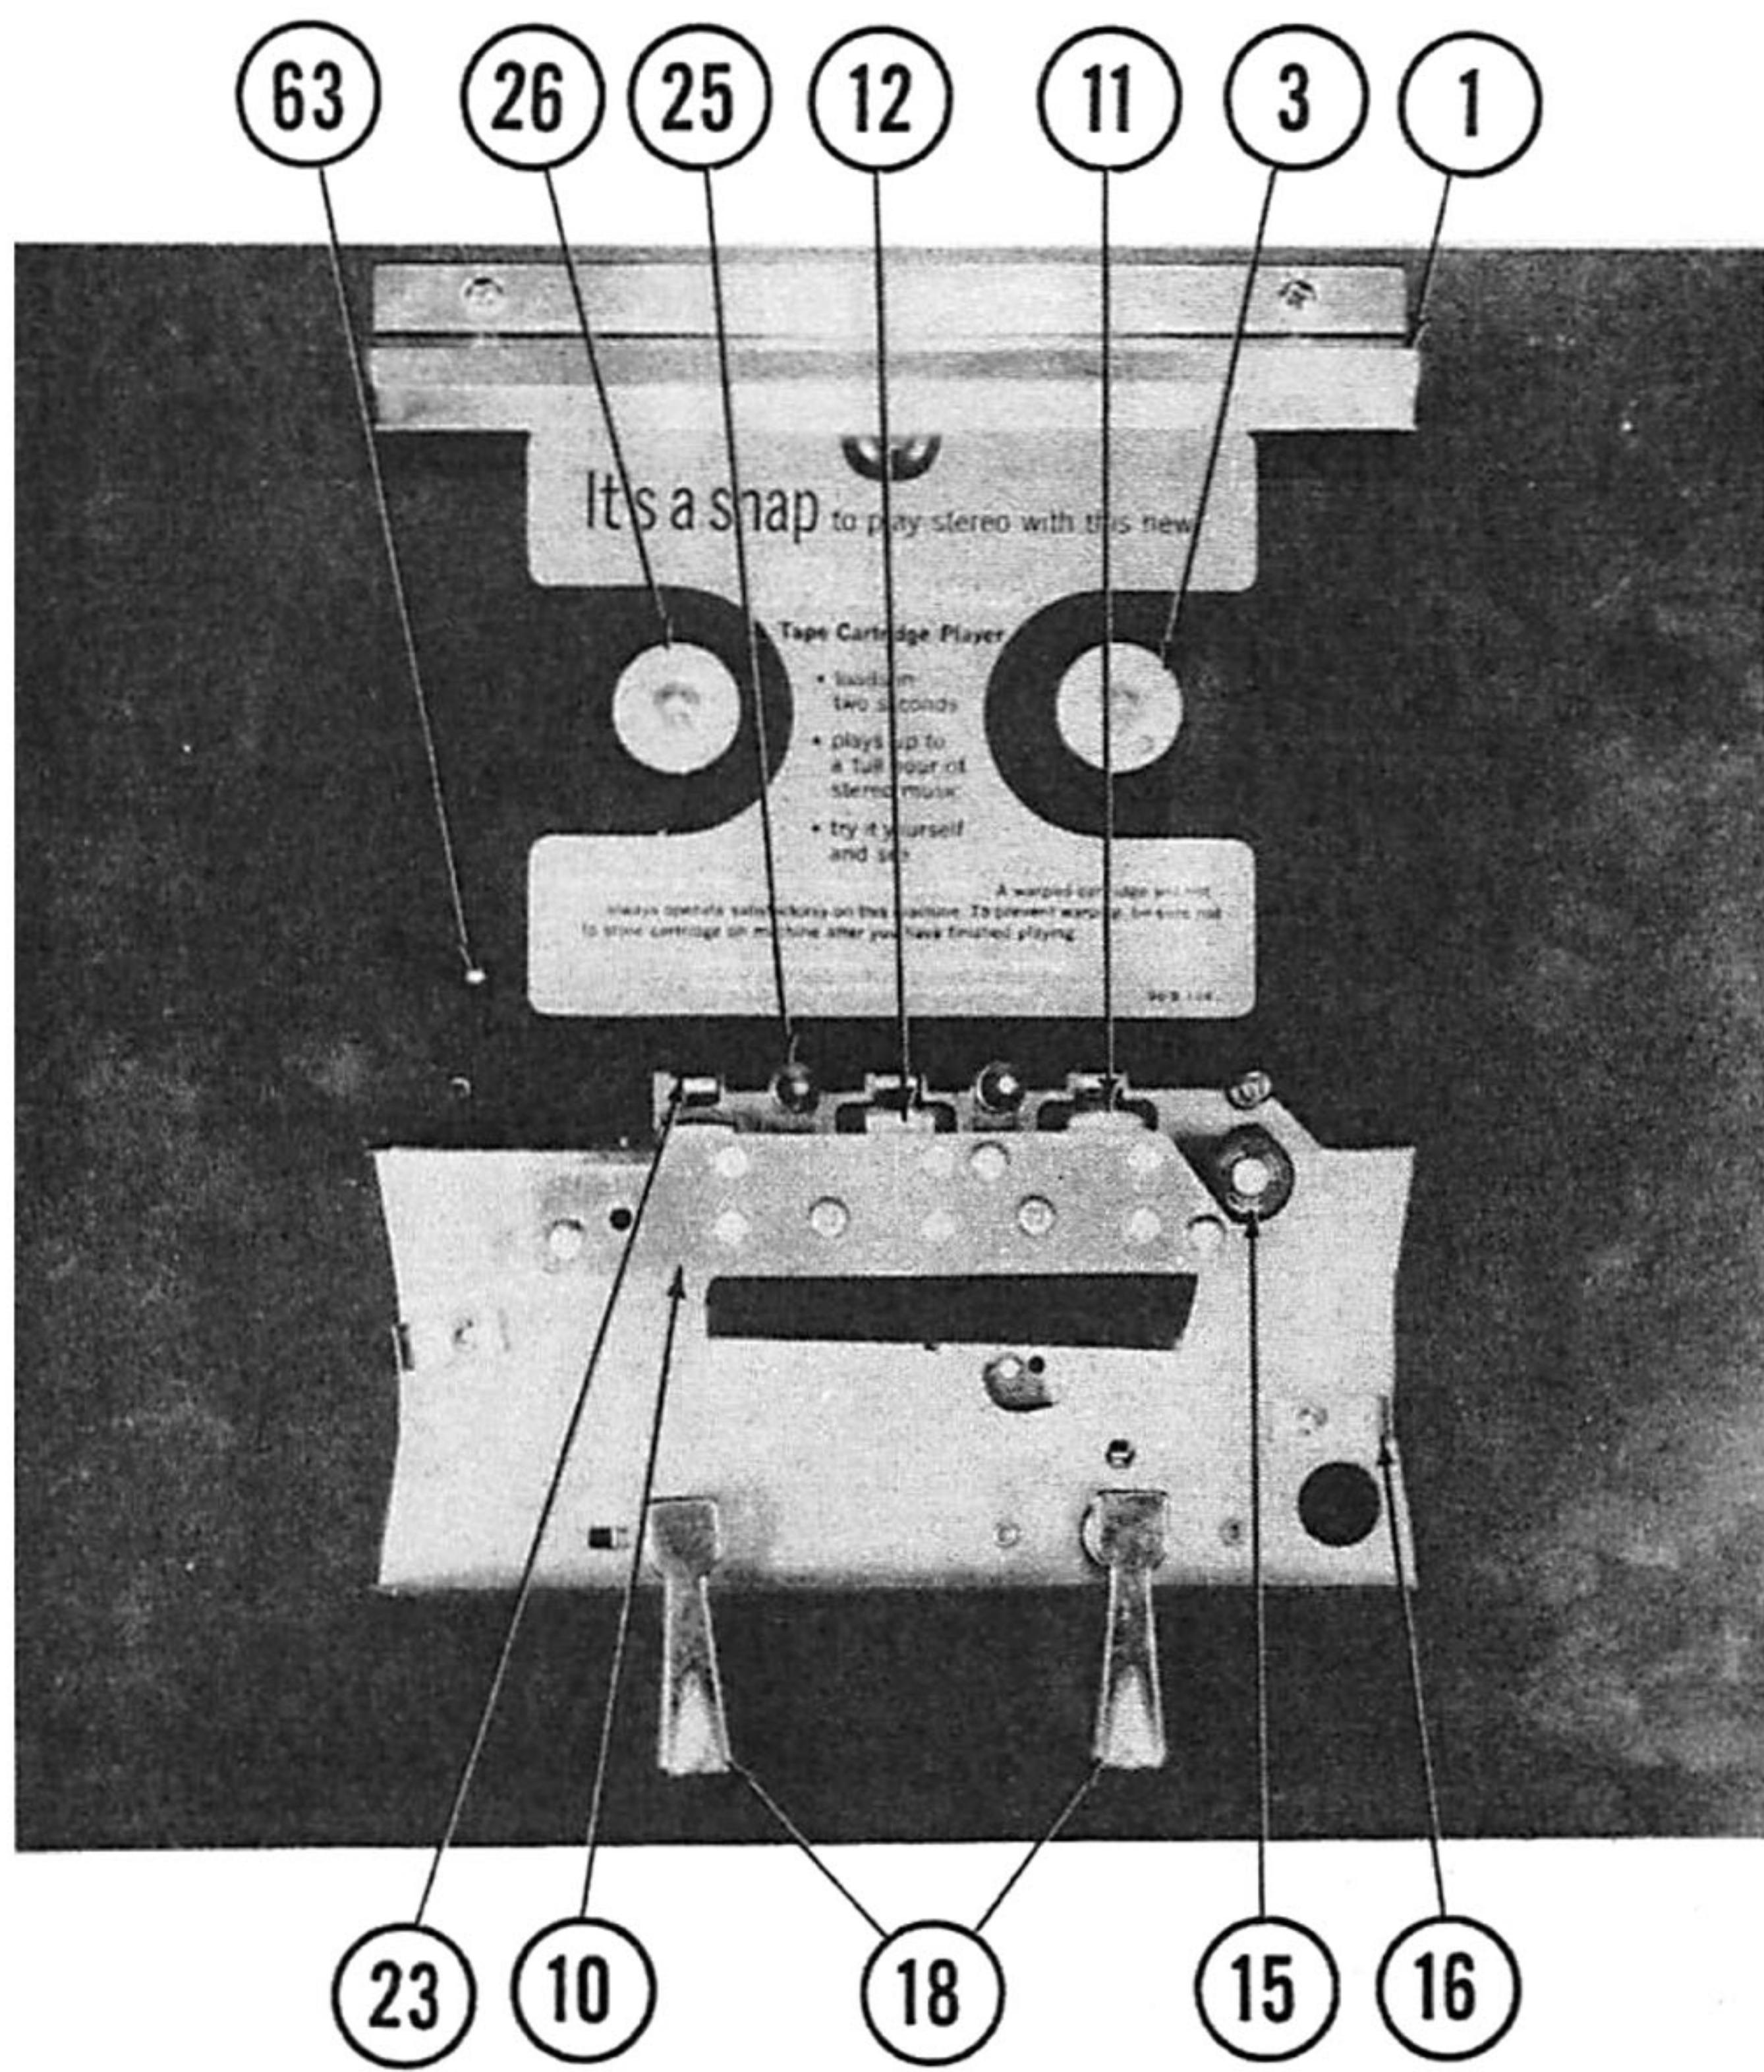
TOP VIEW OF MECHANISM WITH HEAD COVER REMOVED
